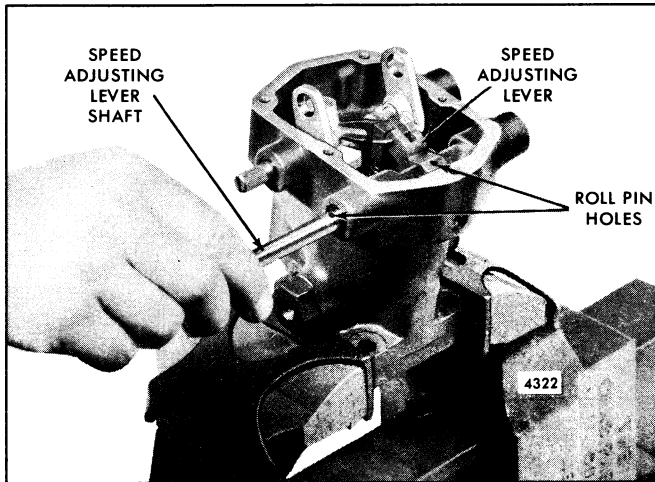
Installing Speed Adjusting Lever Shaft in Governor Housing and Adjusting Lever
